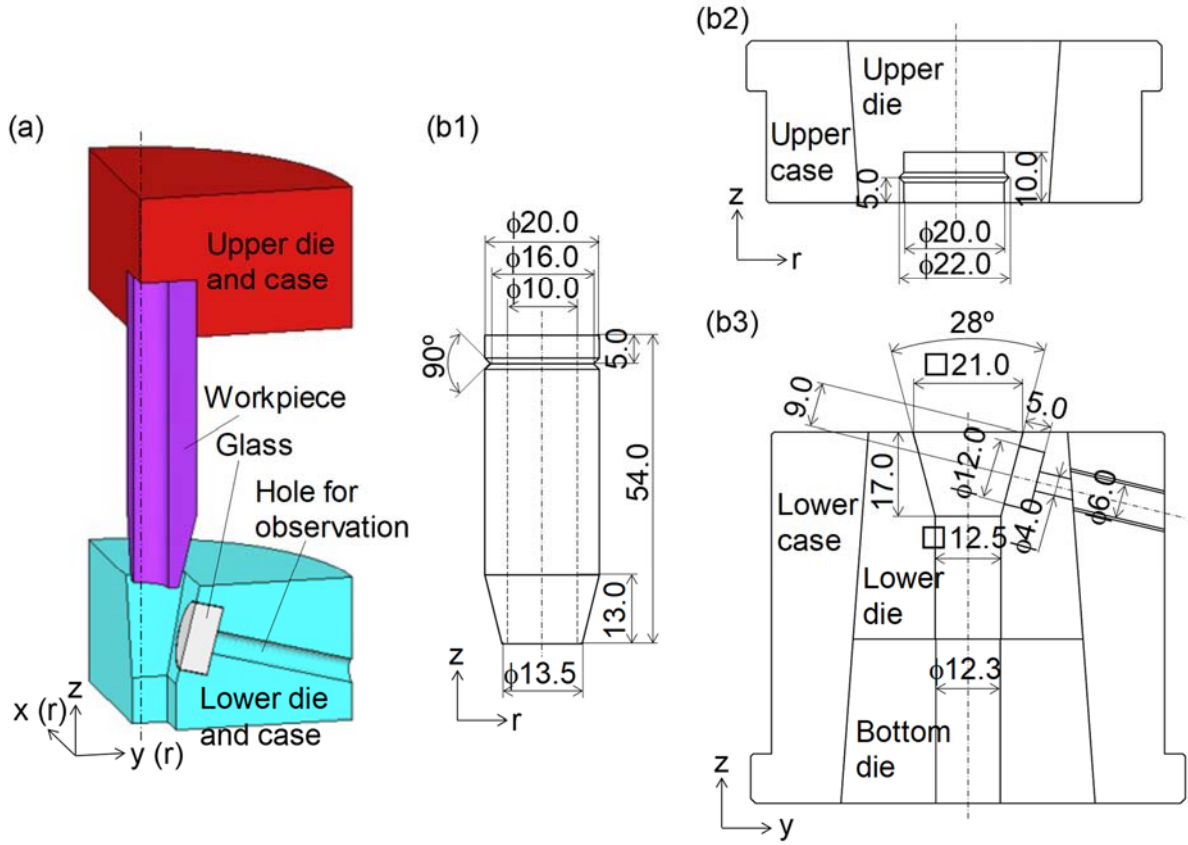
Schematic illustrations of (a) layout and (b) major dimensions of workpiece and dies, (b1) workpiece, (b2) upper die, and (b3) lower die for *in situ* observation of die–workpiece contact interface during forging.
